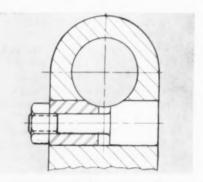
For a double clamp effect, a regular clamp is used in conjunction with the bolt that is shown in this sketch.
